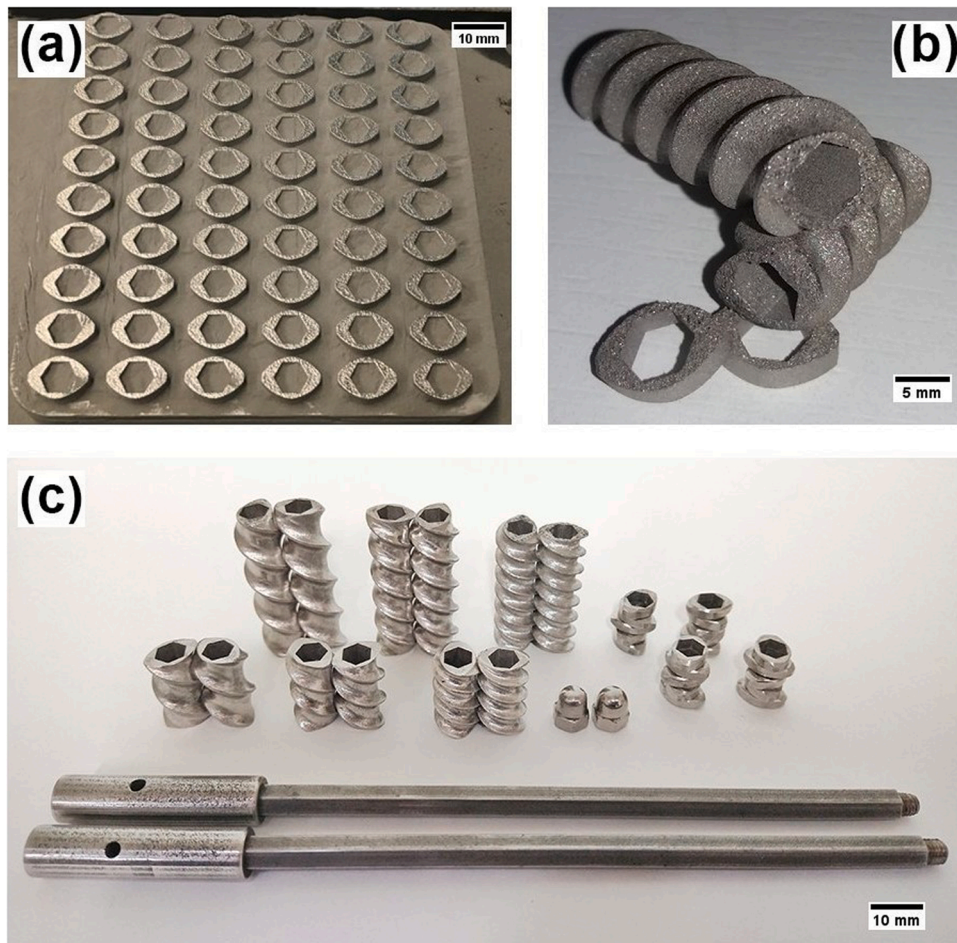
Fabrication stages of the twin screws: (a) kneading discs obtained by SLM, (b) detail of the as-printed elements showing the poor surface finish, (c) set of screw elements and screw shafts coupled to the 3D printed sleeves after post-processing.
